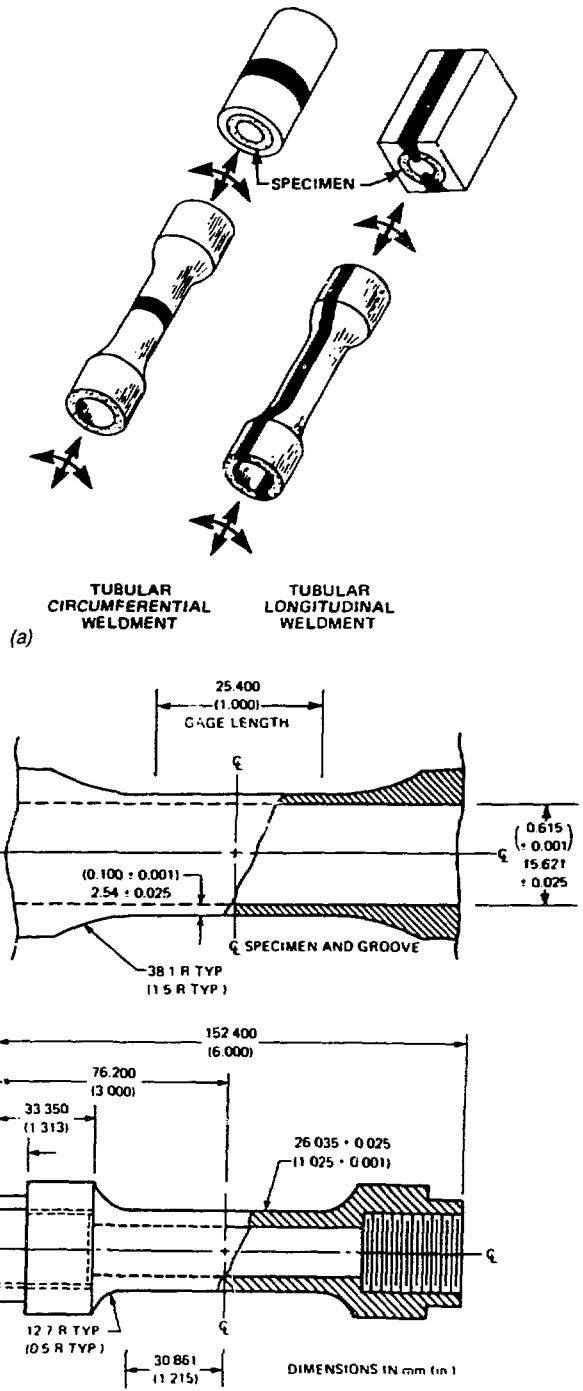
Weld locations and specimen details. (a) Method of obtaining tubular specimens with welds. (b) Dimensions of creep-rupture specimen.
